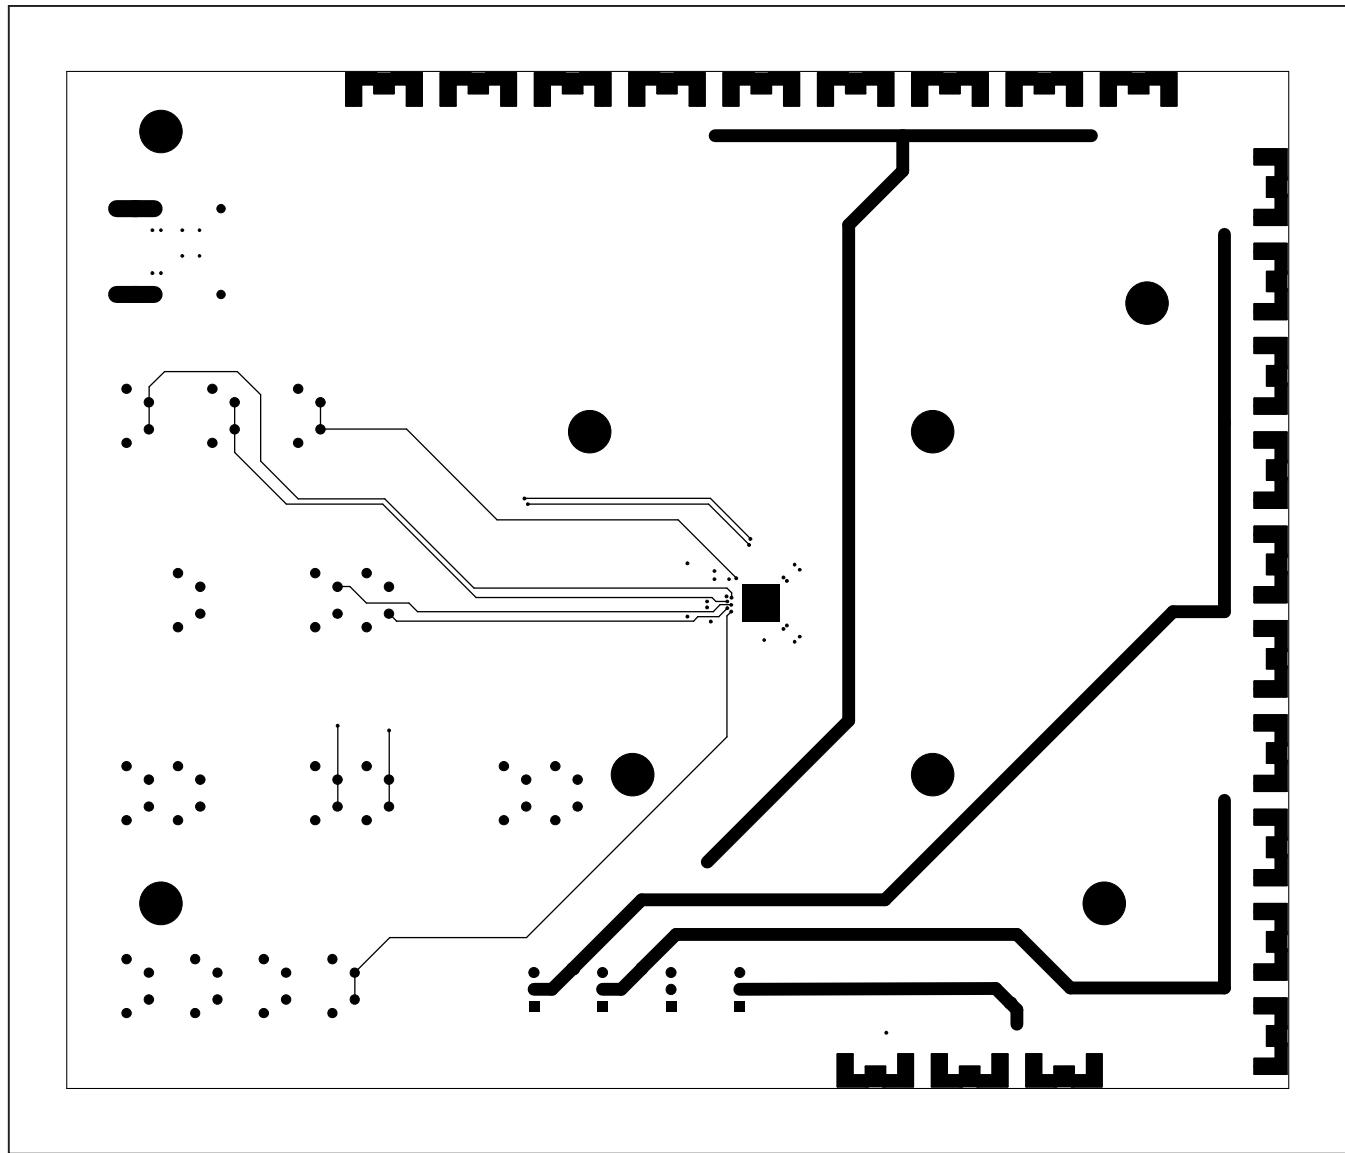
MAX3637 EV Kit PCB Layout—Solder Side
